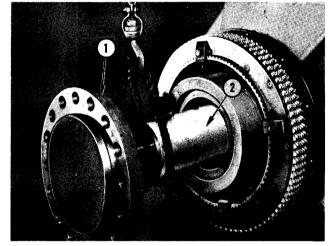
REMOVING AXLE 1. Axle 2. Spacer Tube
